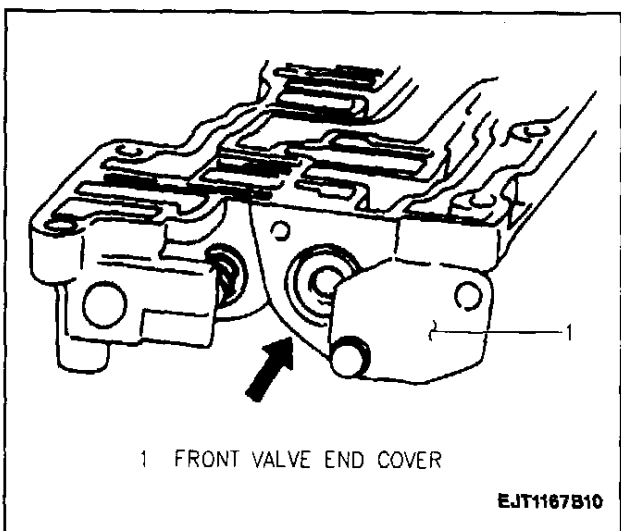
Removing Front Valve Body End Cover (03-72LE, 4-Speed)
